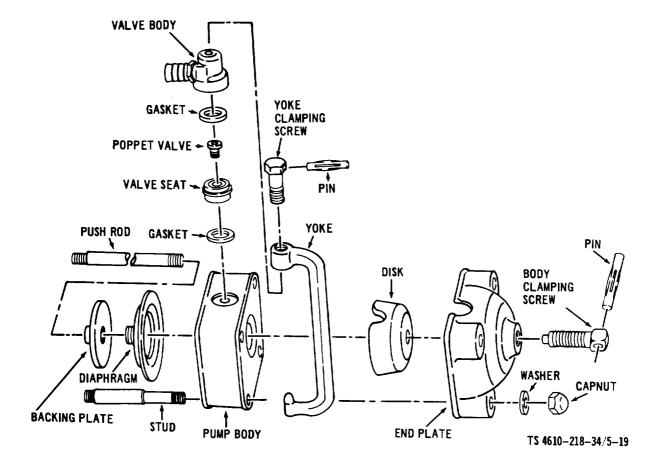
Chemical Solution Feeder Diaphragm Pump, Disassembly and Reassembly
